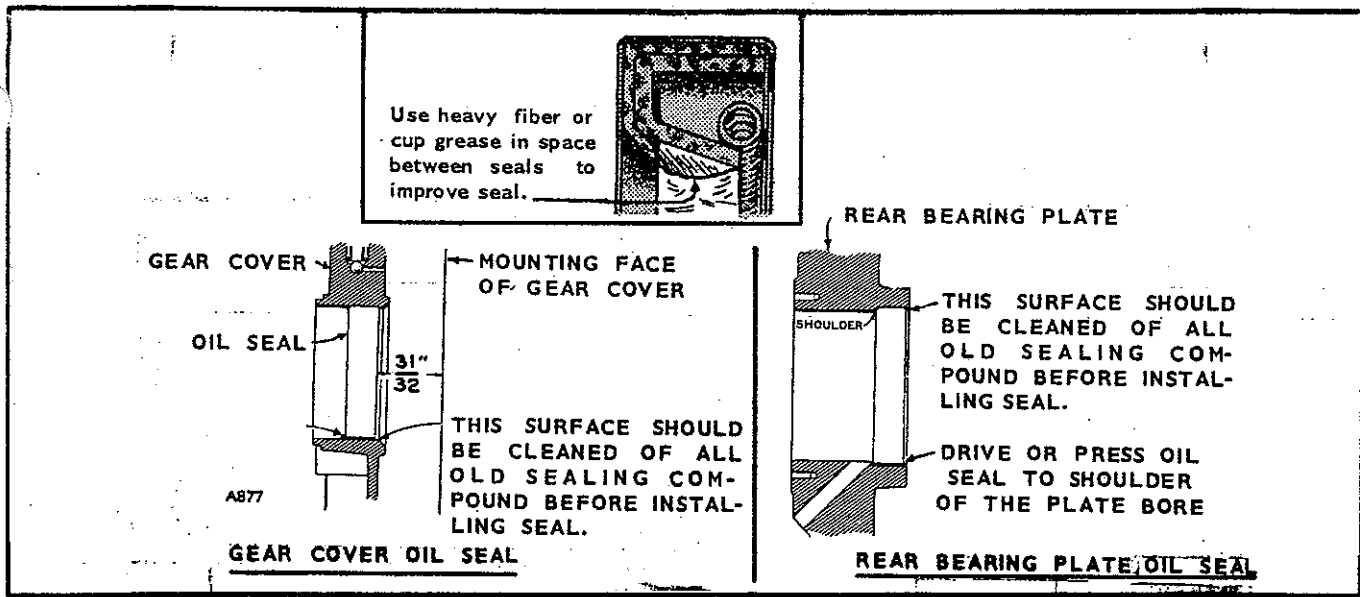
GEAR COVER AND REAR BEARING PLATE OIL SEALS
